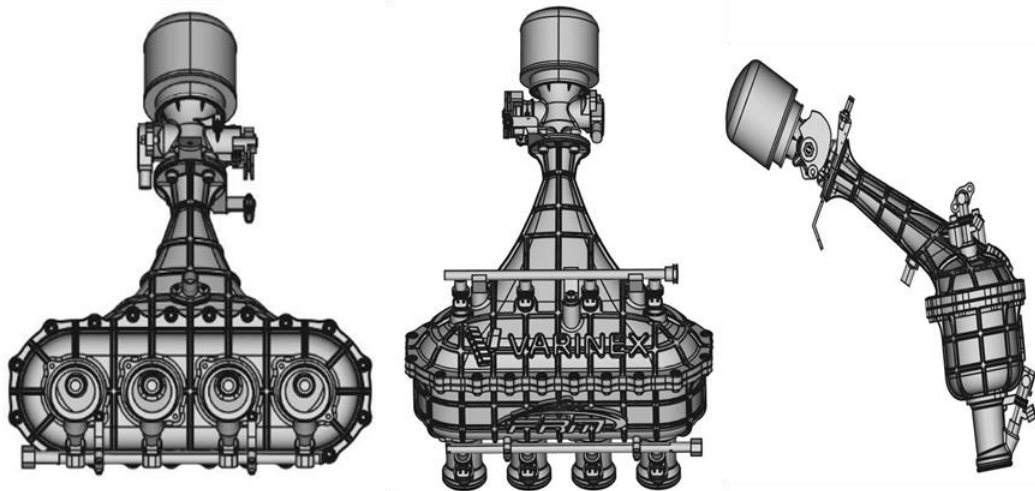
Honda engine Intake manifold 3D geometry along with restricted, primary injectors and secondary injectors.
